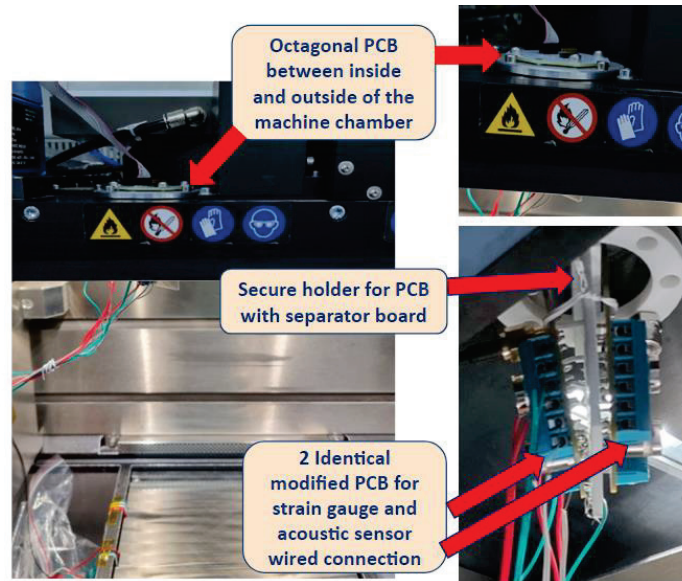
Wired connection for the acoustic emission and strain gauge wires routed out from the base plate to the adaptor PCB then to the octagonal PCB
